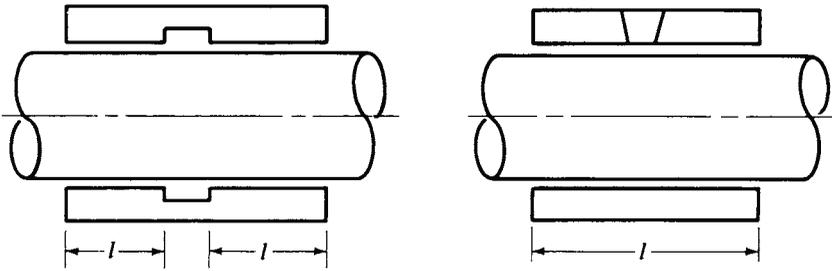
Length,  $l$ , of bearing for circular groove type (left) and single inlet hole type (right).
